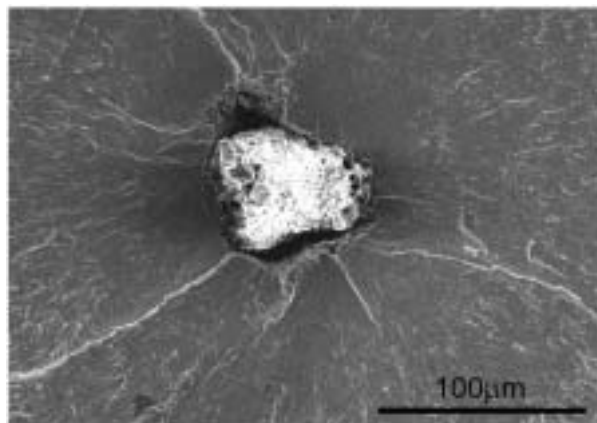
Large aluminium oxide inclusion at the fatigue crack origin.
